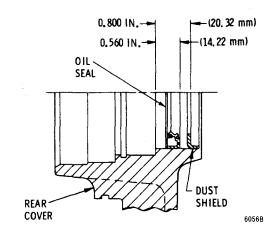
Oil and dust shield installation (TTB with converter-driven PTO)
